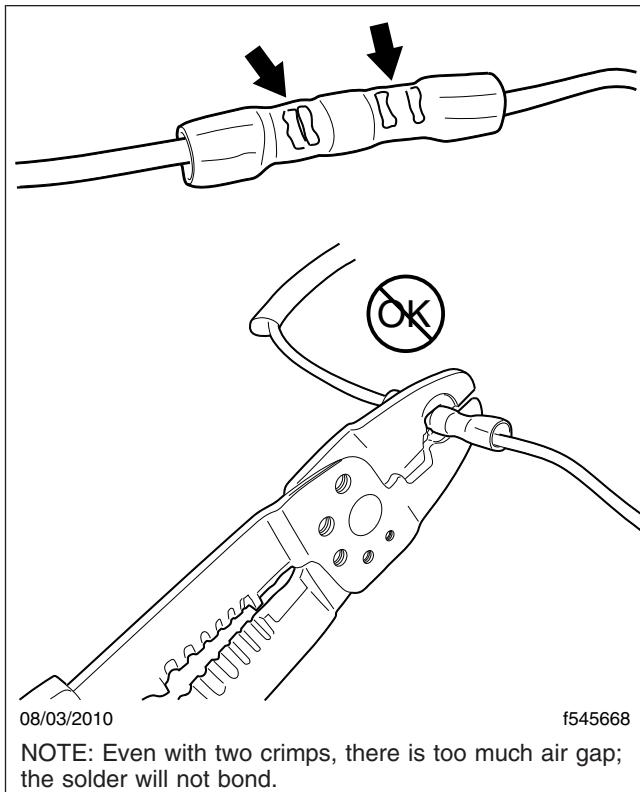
, Wrong Tool Being Used and a Crimp That Will Fail
